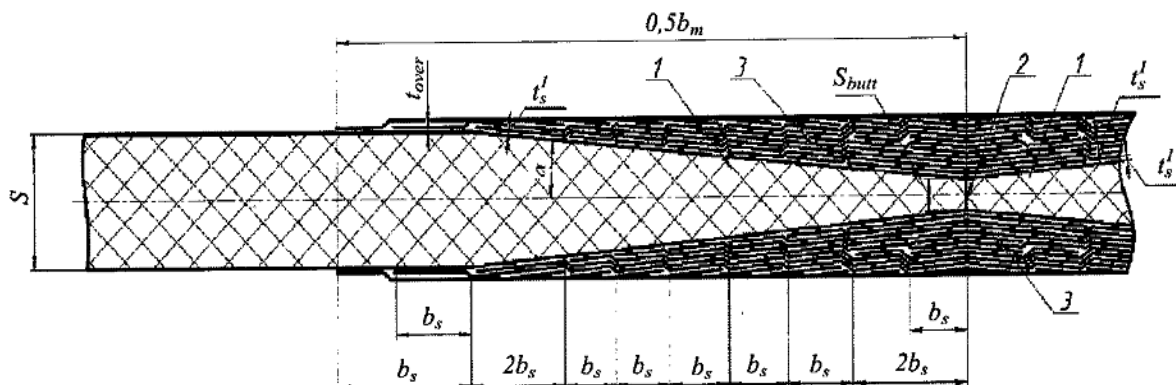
Structural scheme of a moulded butt (seam) joint of single-skin members with double stepped beveling:
